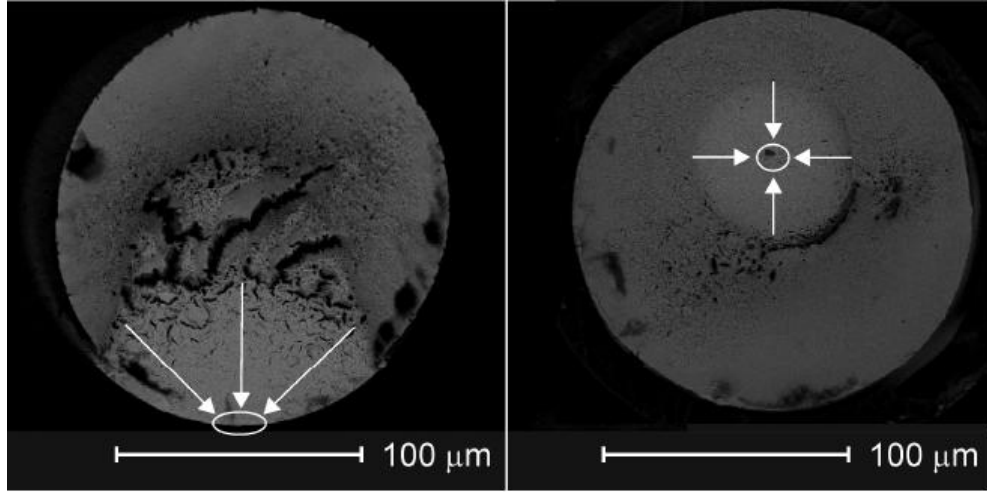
Fatigue crack areas (a) Surface. (b) Internal [1].
